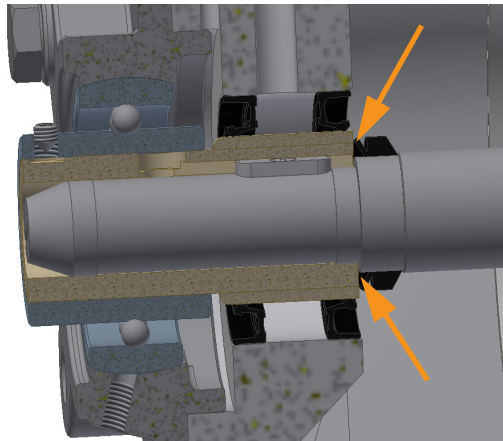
Bushing is up against the rotor stop (similar to illustration)
